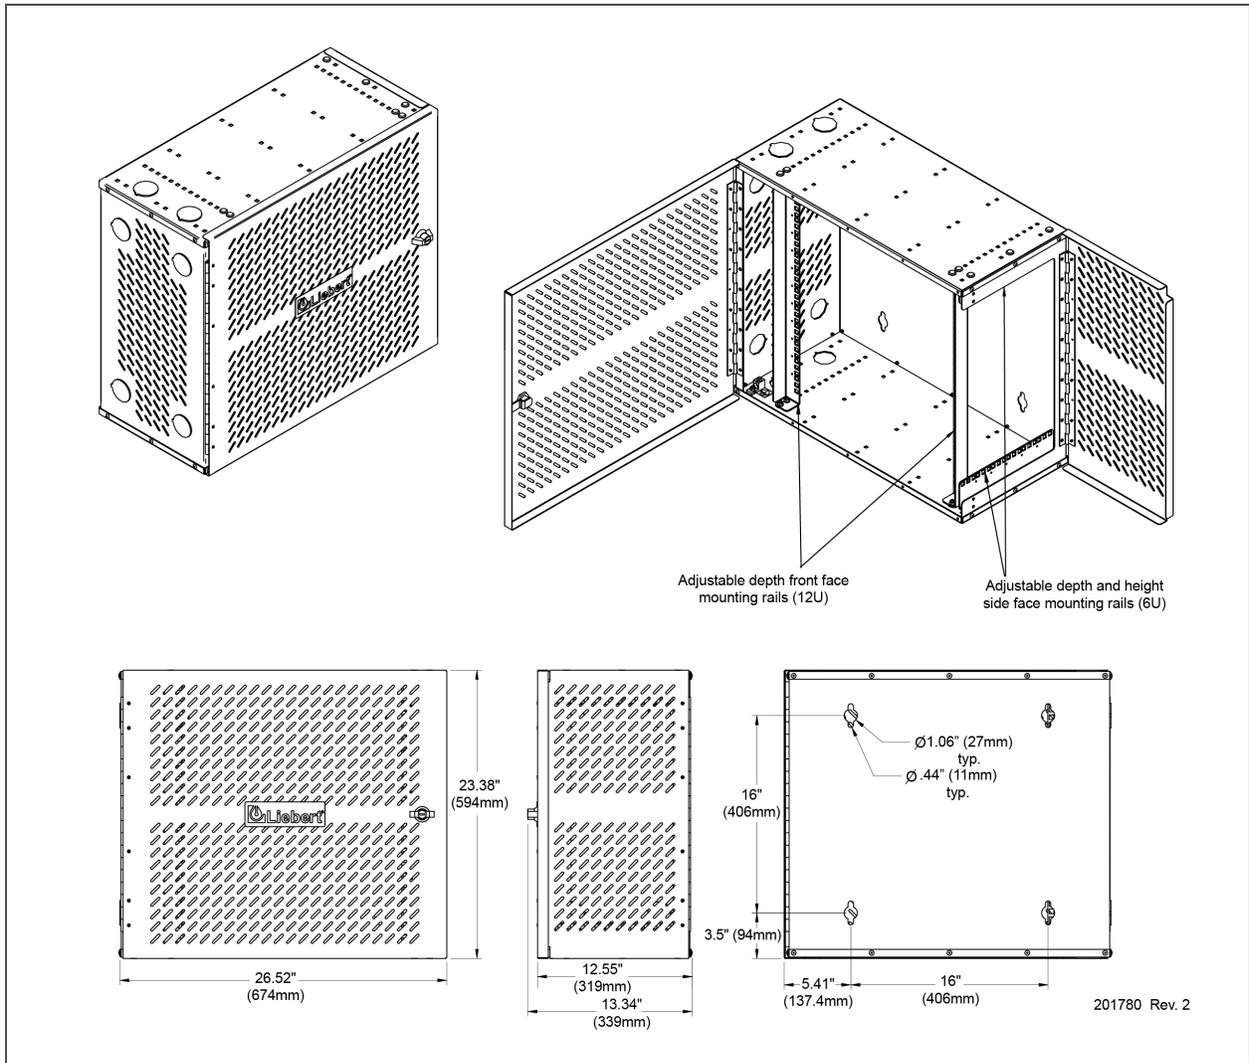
Liebert® MCR 12U hinged body wall-mount dimensions and features
